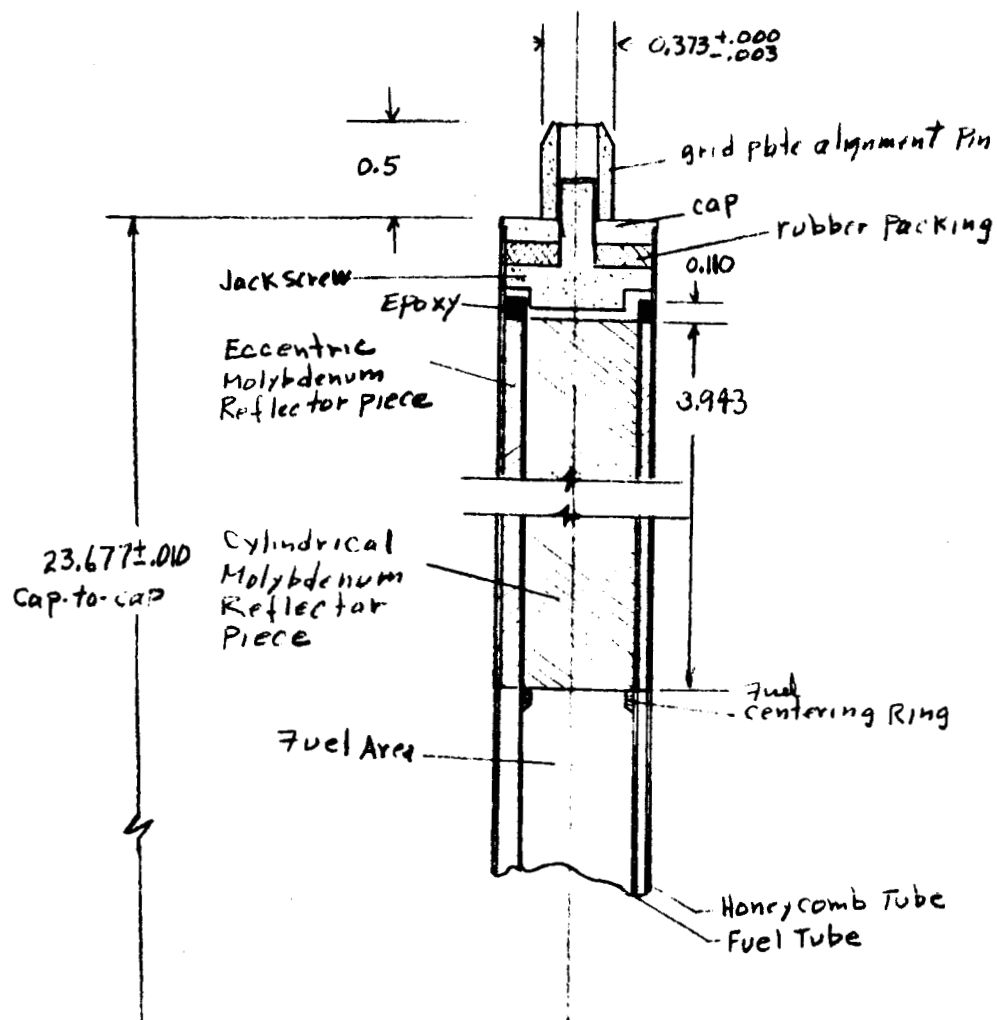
Fuel element closure method and end reflector design. All dimensions in inches.
